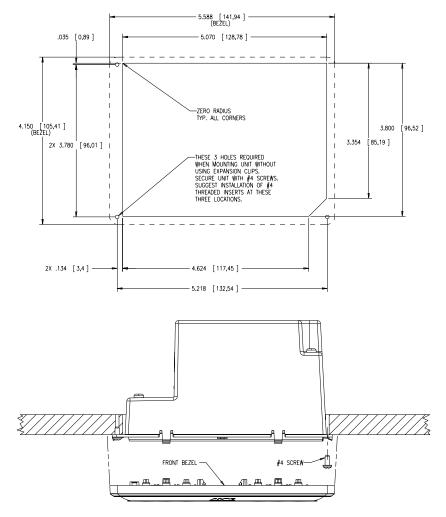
NXD-500i Wall Mount panel dimensions using #4 mounting screws
